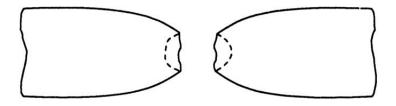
"Double-Cup" Failure of an Aluminum Alloy Test Piece
